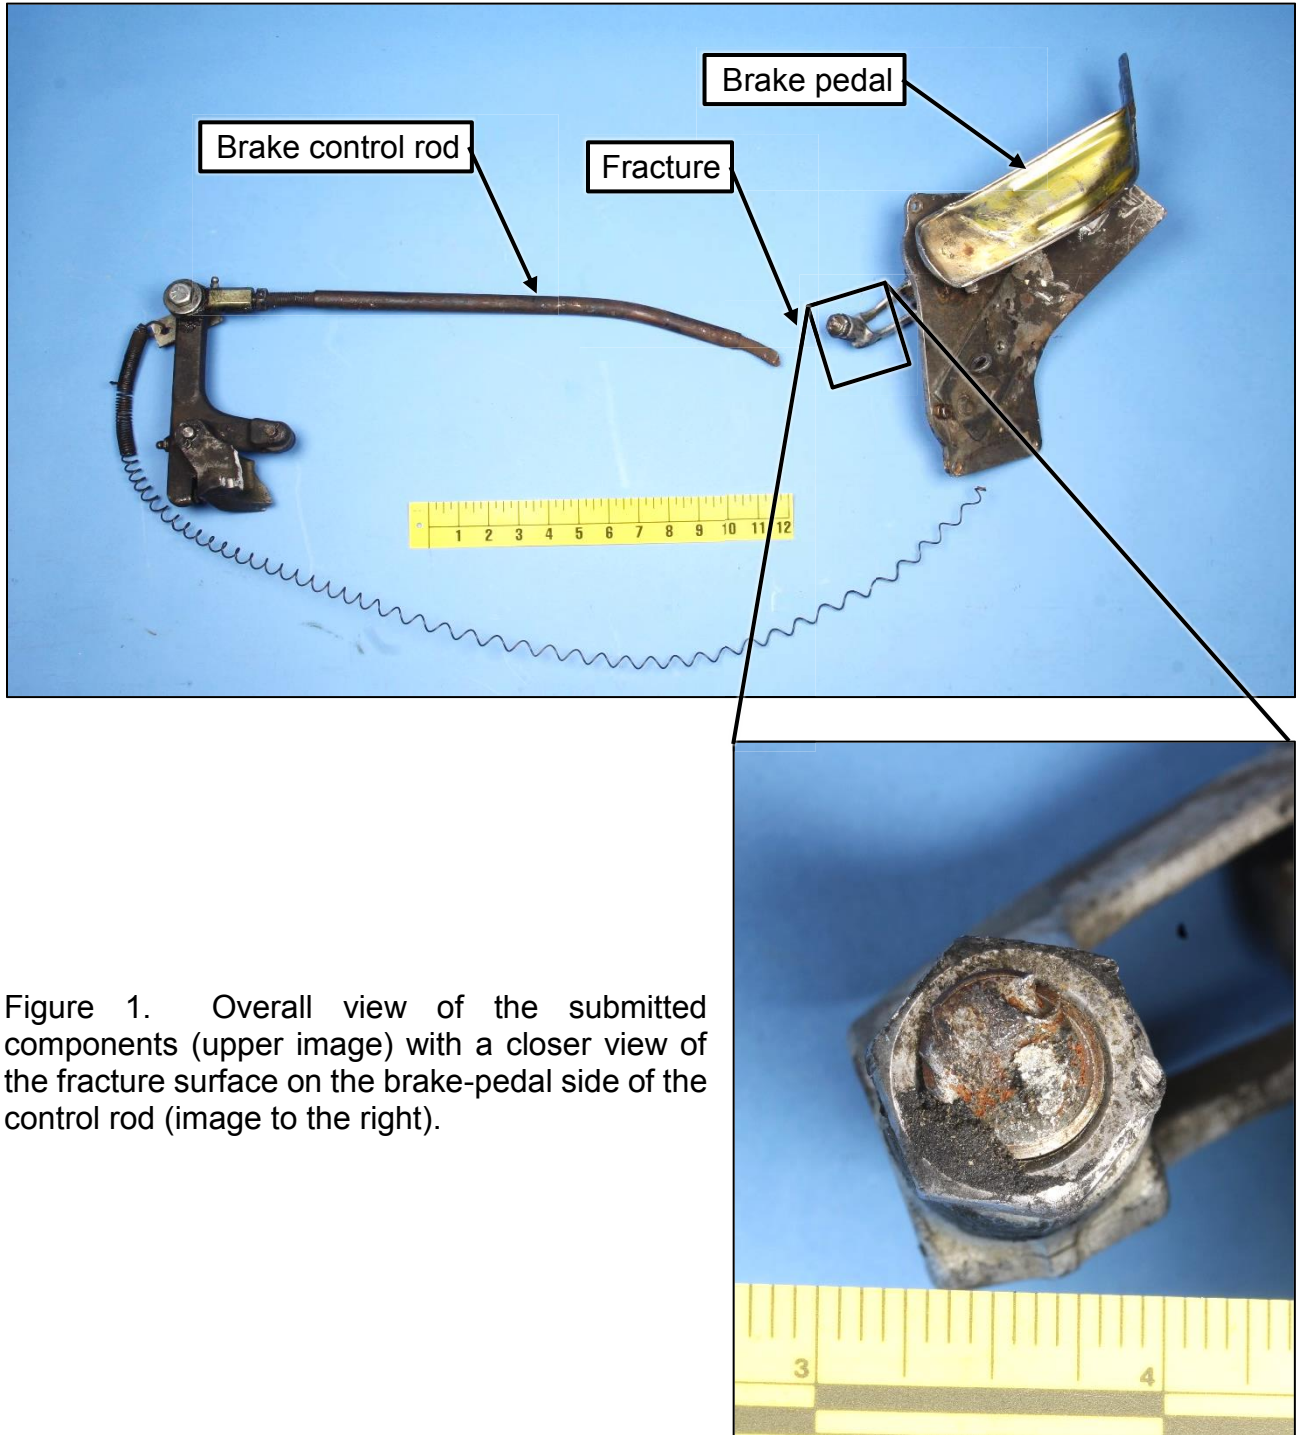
Overall view of the submitted components (upper image) with a closer view of the fracture surface on the brake-pedal side of the control rod (image to the right).
